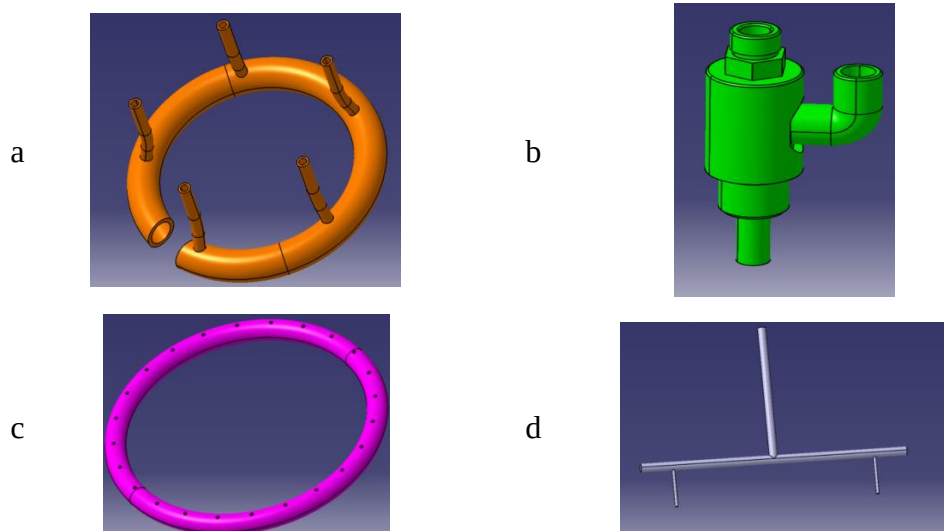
Cooling pipes a) nozzle b) single c) holes d) side block
